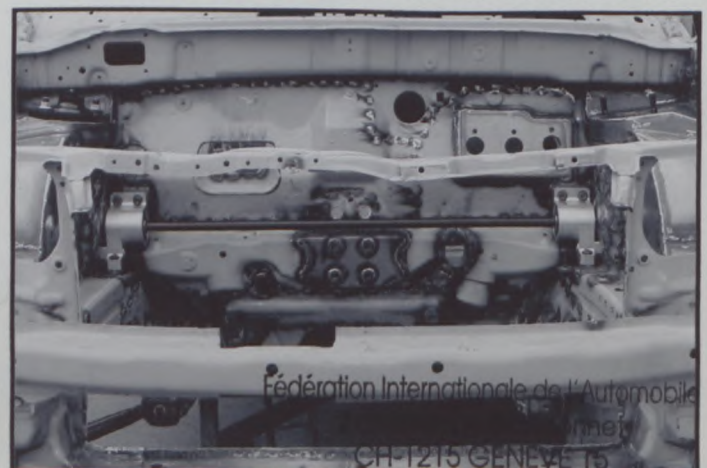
Front stabilizer mounted in ENG room
